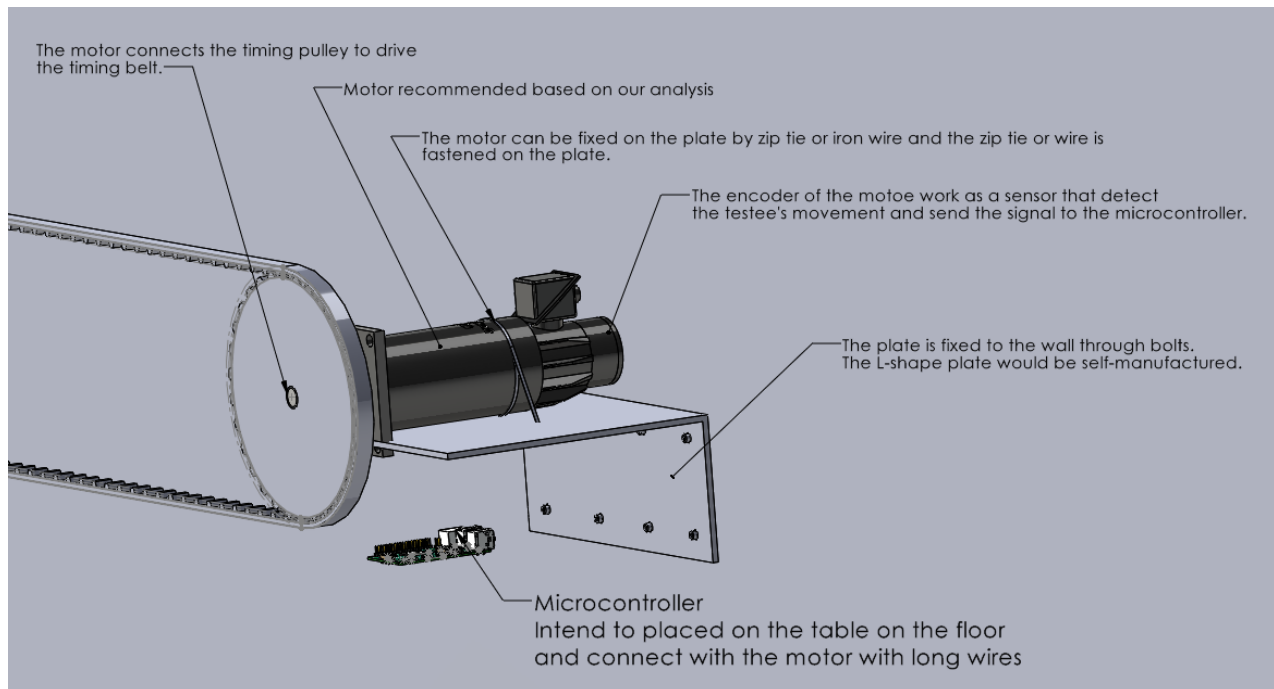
Motor mounting methods and how the motor connects to the microcontroller. Microcontroller will be placed lower near the ground level with wires, while plates fixed to the wall will support the motor and the gearbox.
